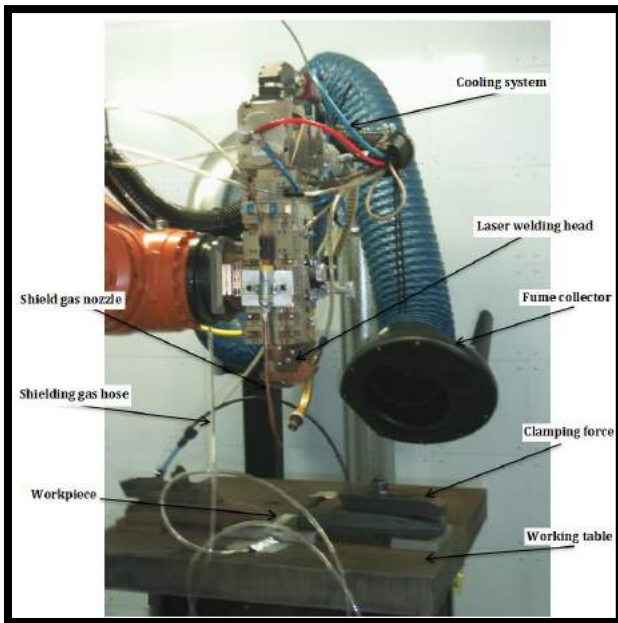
Experimental set-up for the keyhole fiber laser welding
